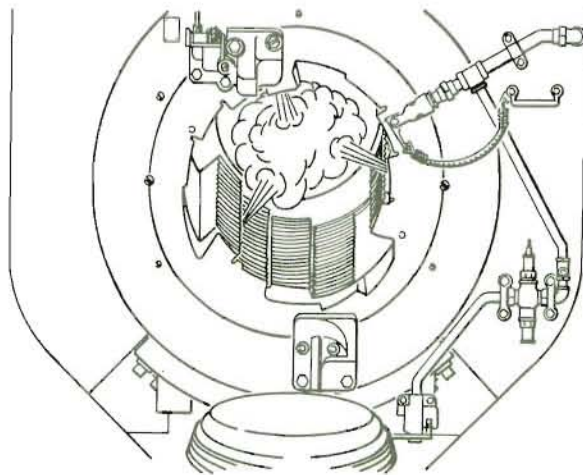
J. 16-inch Gun Assemblies. Gas Ejector Action. Breech Open.
